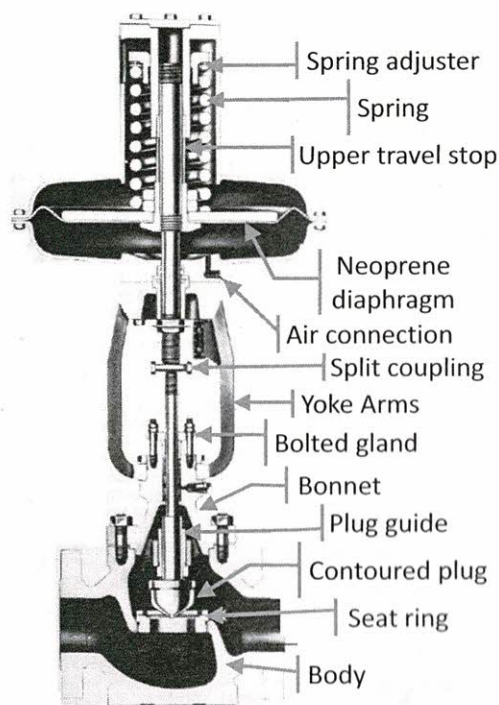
Cross-sectional drawing showing major parts of a control valve (courtesy of Fisher Controls International, LLC).
